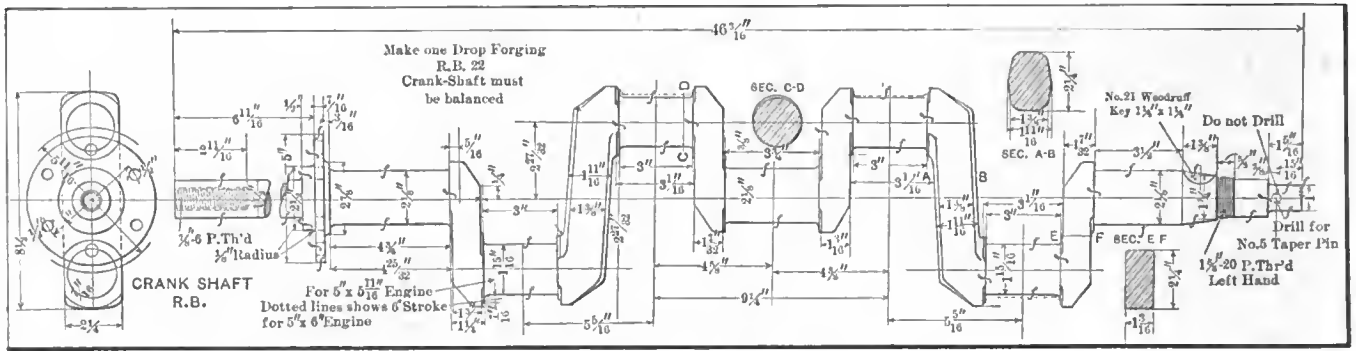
Crankshaft, with flange for flywheel, substantial cheeks, liberal bearings and good material
